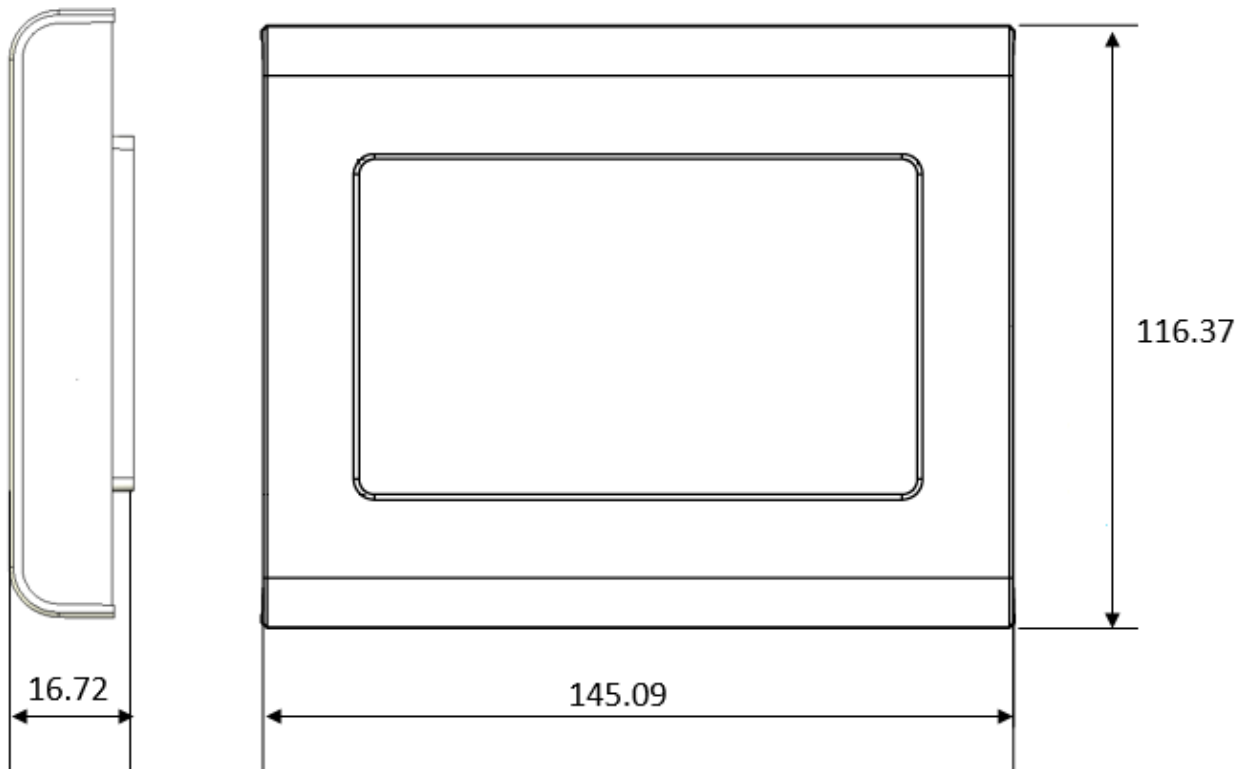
PanL50 (PD50) Touch Display Dimensions
